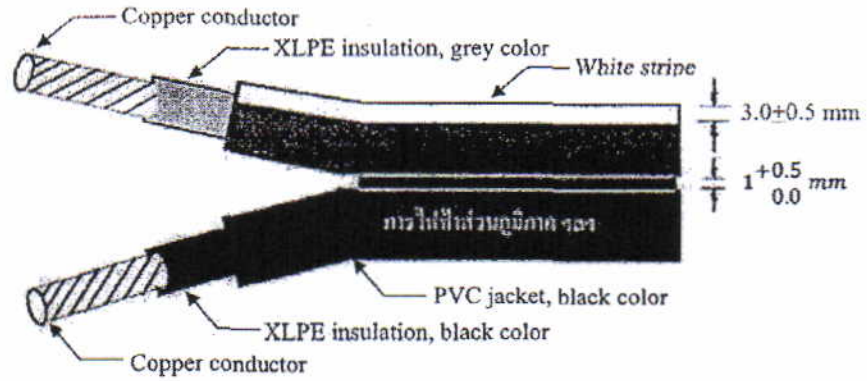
Construction and marking of XLPE insulated and PVC jacketed cable
